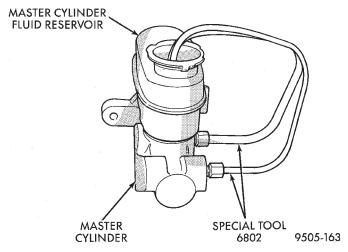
Bleeding Tubes Attached To Master Cylinder With ABS
